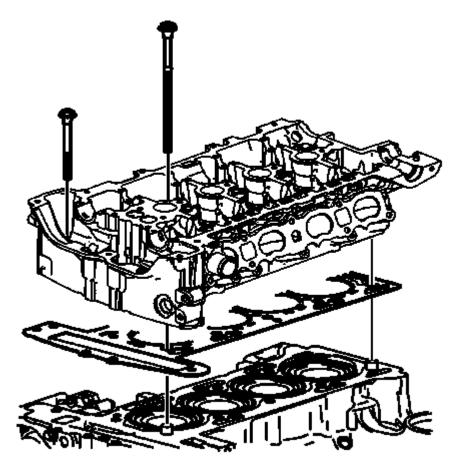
Cylinder Head And Gasket Courtesy of GENERAL MOTORS COMPANY
